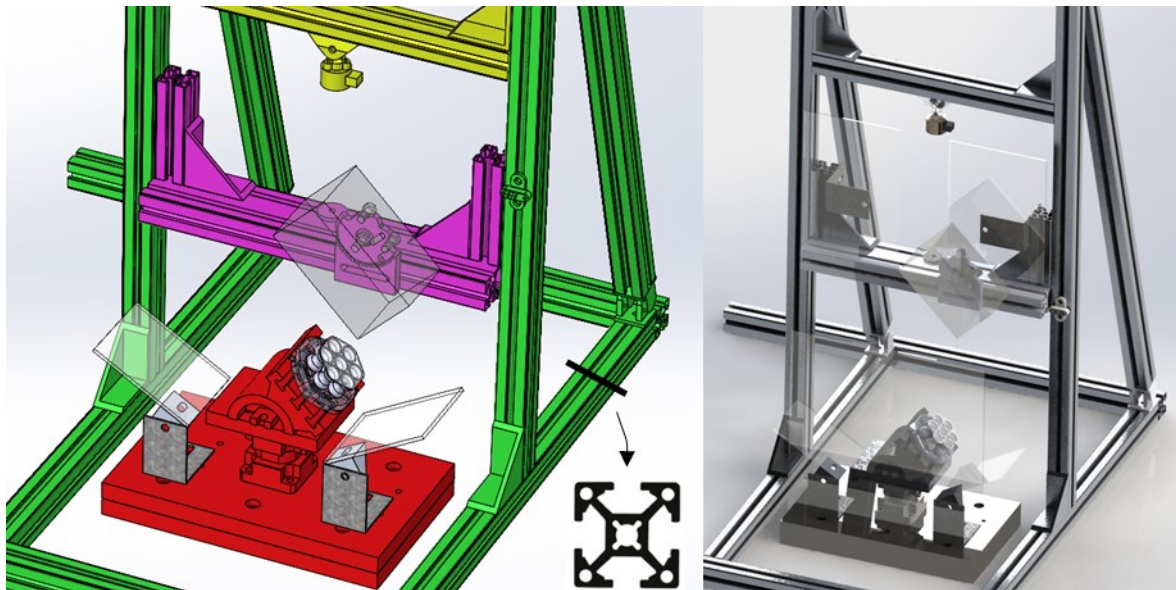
Left: Colour-coded drop tower subassemblies: Green: Main frame, Purple: Carriage, Yellow: Magnet assembly, Red: Base. The cross-sectional profile of the aluminium extrudes is outlined in black. A rendering of the drop tower is shown on the right.
